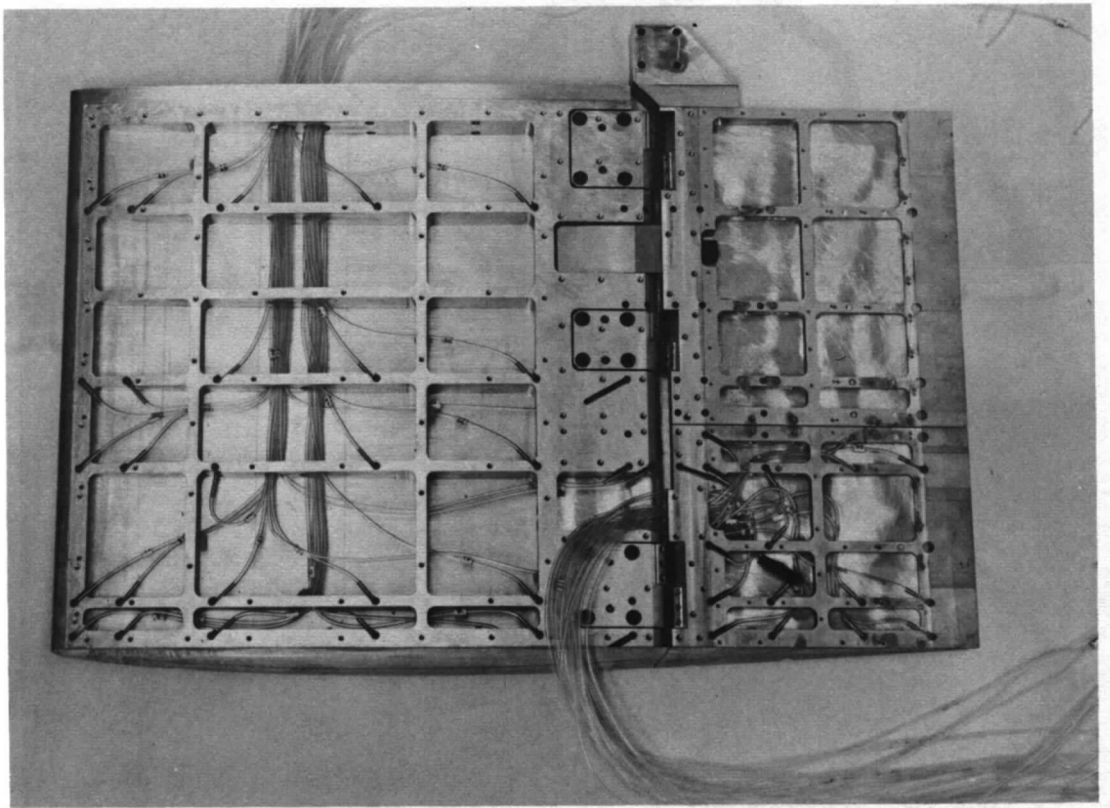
Port upper side, installation of tubed pressure measuring system.
